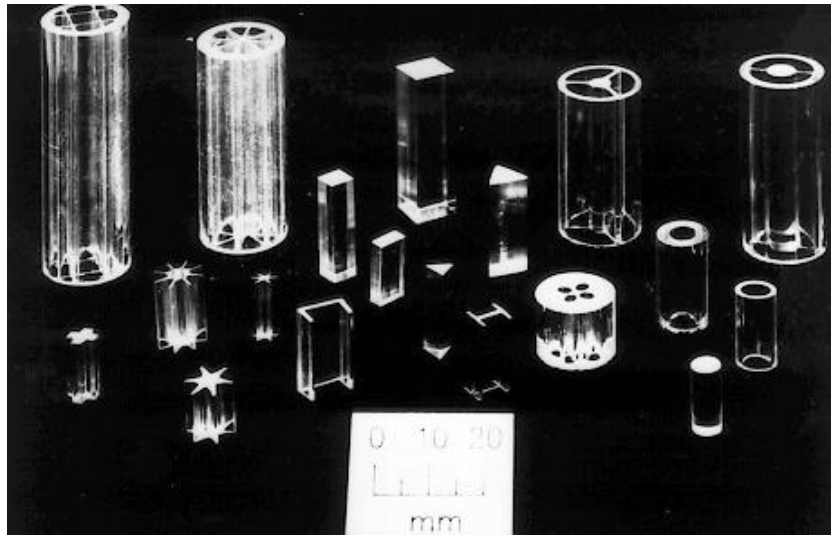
Complex sections produced by extrusion. (Professor E Roeder, University of Kaiserslautern.)
